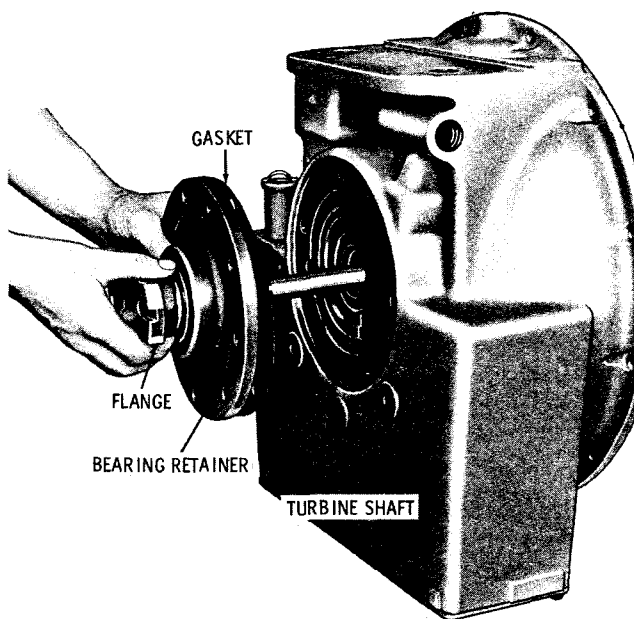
Installing automotive shaft assembly (TC 200)
